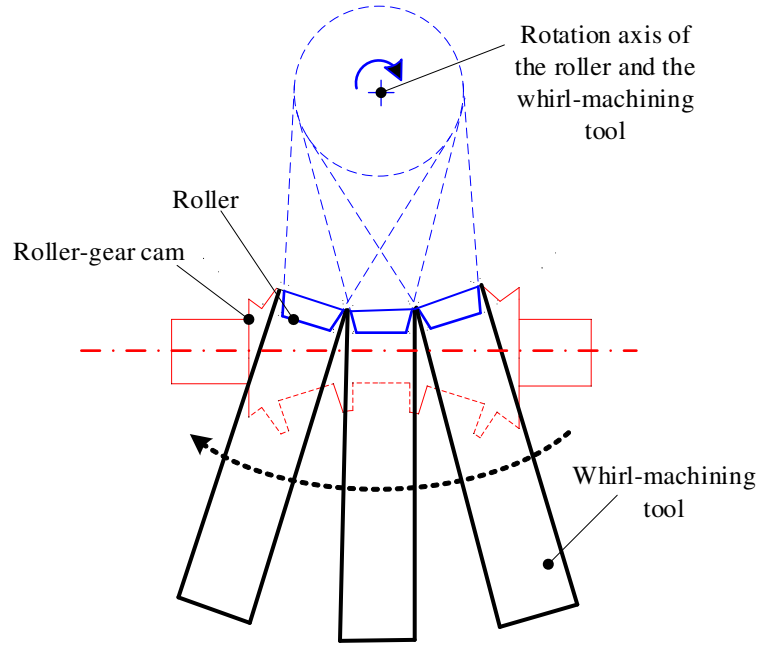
Process of globoidal shape machining using the whirl-machining tool
